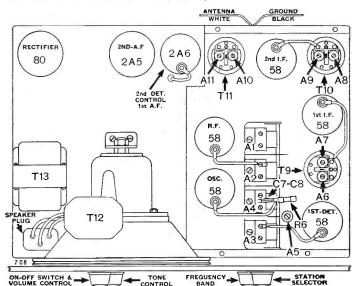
Top view of the 708 and 808 chassis, showing the location of trimmers, etc.
